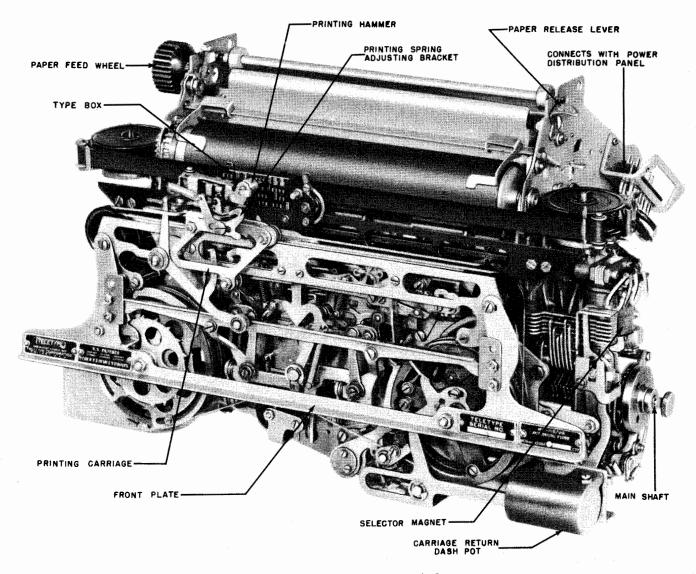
Automatic Typer MX-1115/UG, Front View
